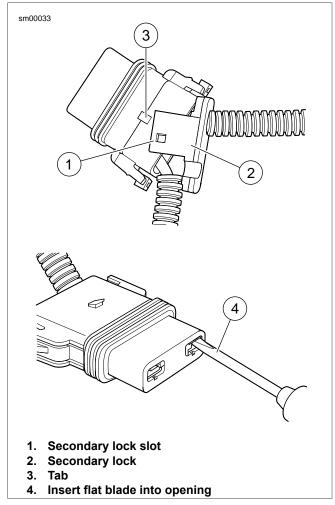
Delphi 800 Metri-Pack Sealed Main Fuse Housing: Remove Socket Terminals
